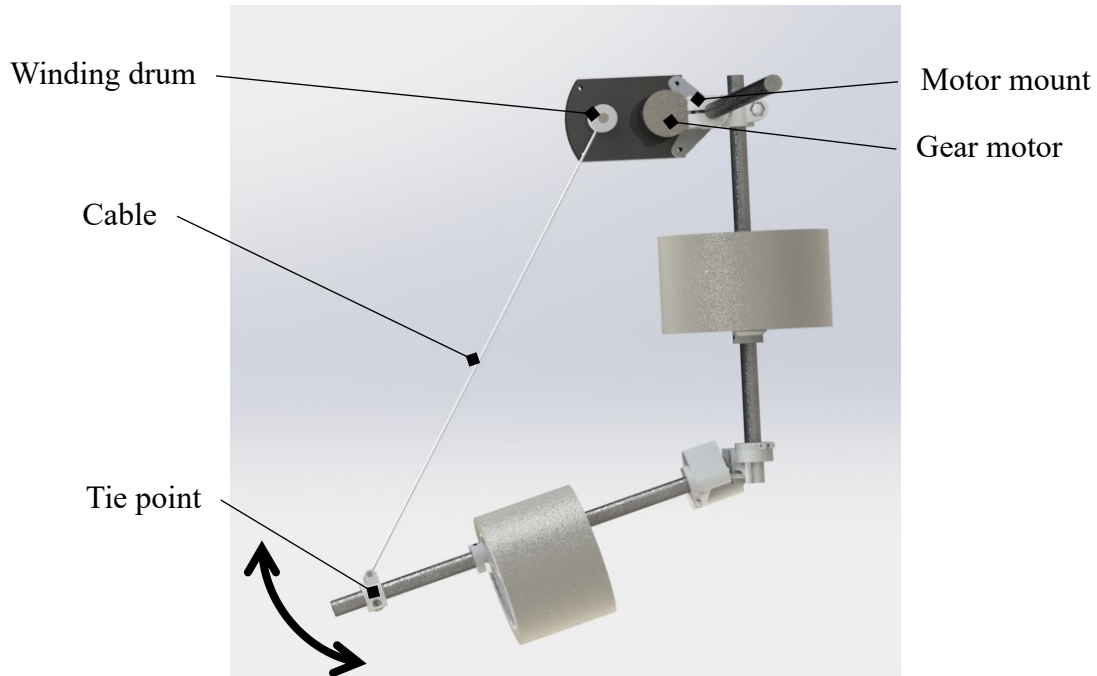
Jig actuation setup showing the motor, cable and tie point.
